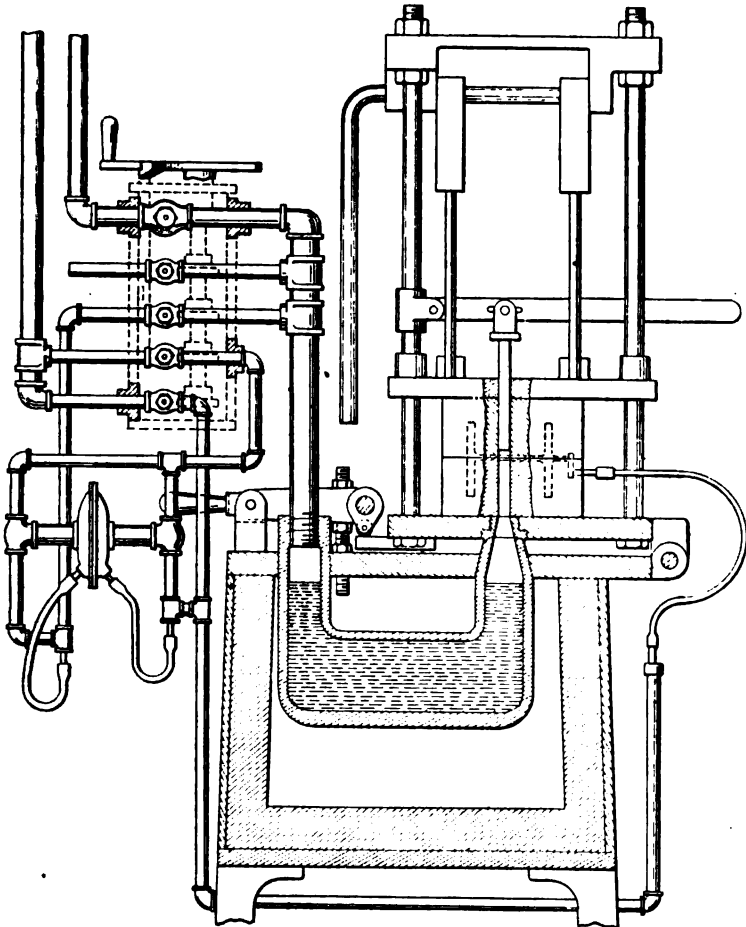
ANOTHER TYPE OF COMPRESSED-AIR MACHINE.
